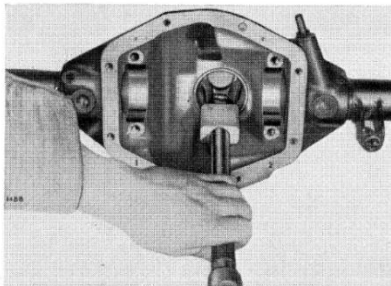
Using Tool No. S.123A to remove pinion bearing outer rings
